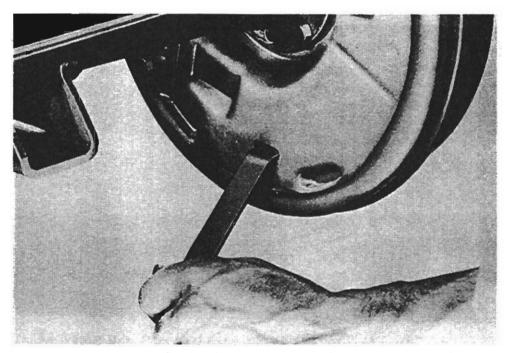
Insert Brake Adjusting Wrench J-1028 Through the Adjusting Slot to Turn the Adjusting Screw.
